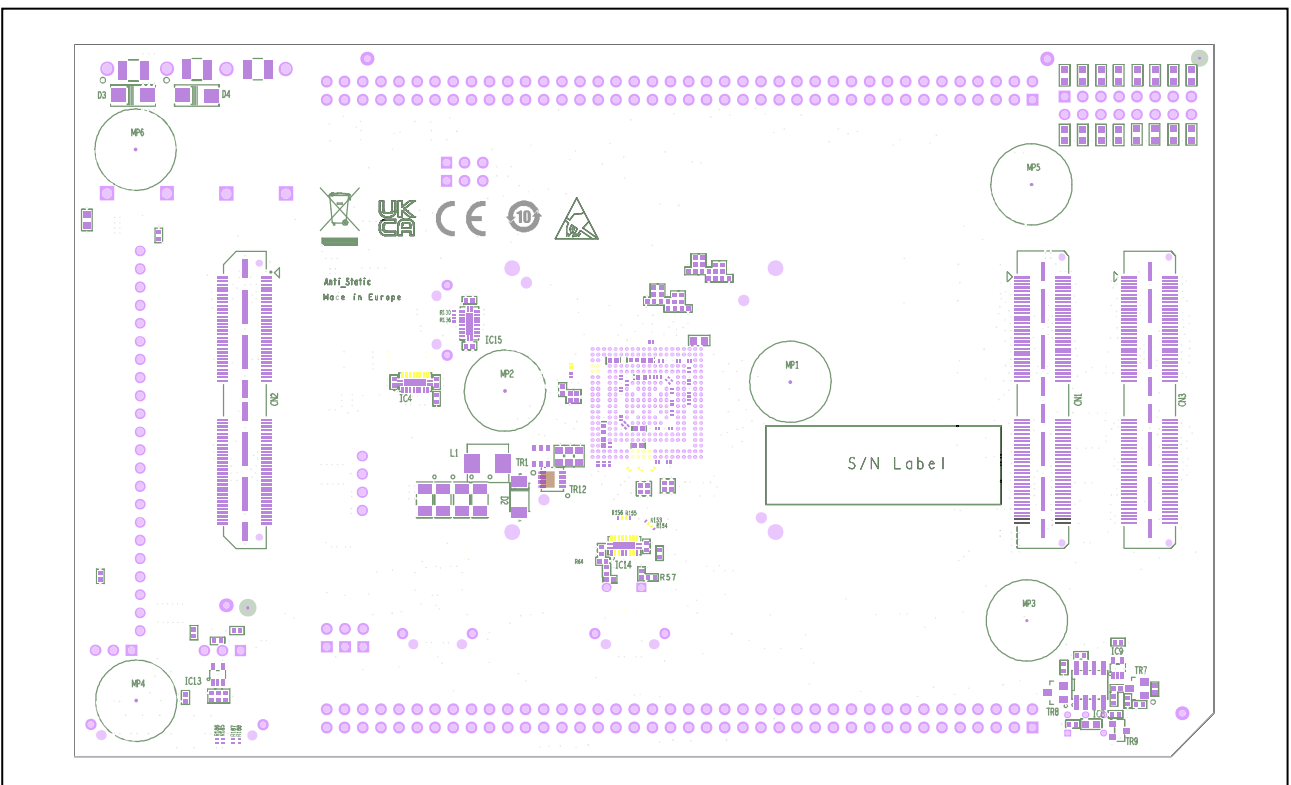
D018567_06_V01 Piggyback board bottom view
